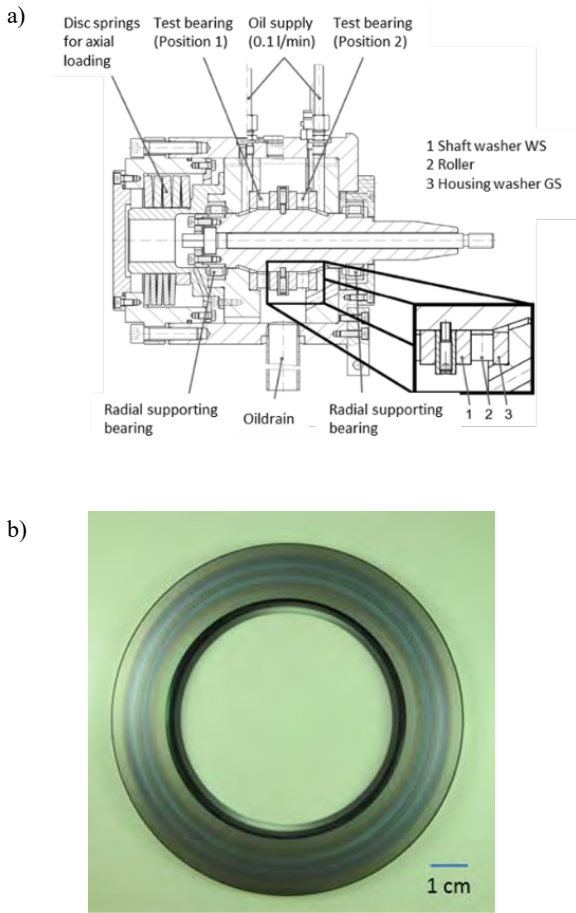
FE-8 test rig for bearing life test. a) head of FE-8 test rig for characterization of rolling contact lubrication, b) axial bearing washer with boundary layers after test.
